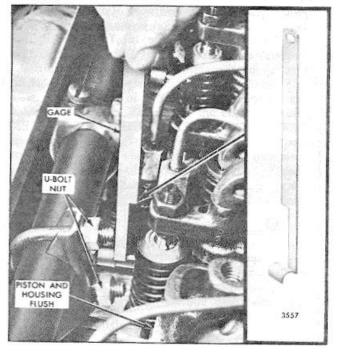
Adjusting Throttle Delay Cylinder (Former)
